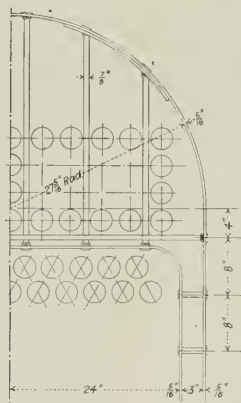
DETAIL OF SIDE FURNACE SHEET OF LOCOMOTIVE-TYPE BOILER SHOWING STAYING
